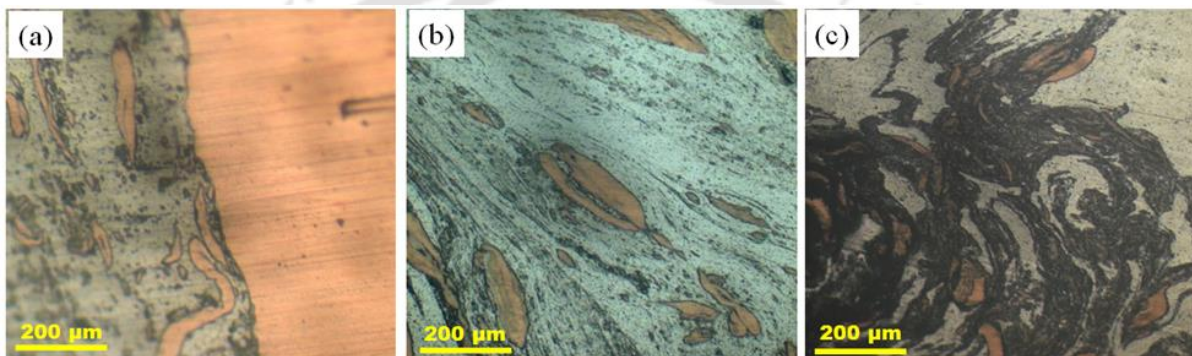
Material flow pattern and types of bond formation during welding at 2 mm of tool offset, 815 rpm and 98 mm/min welding speed and without any preheating in the weld nugget zone.
